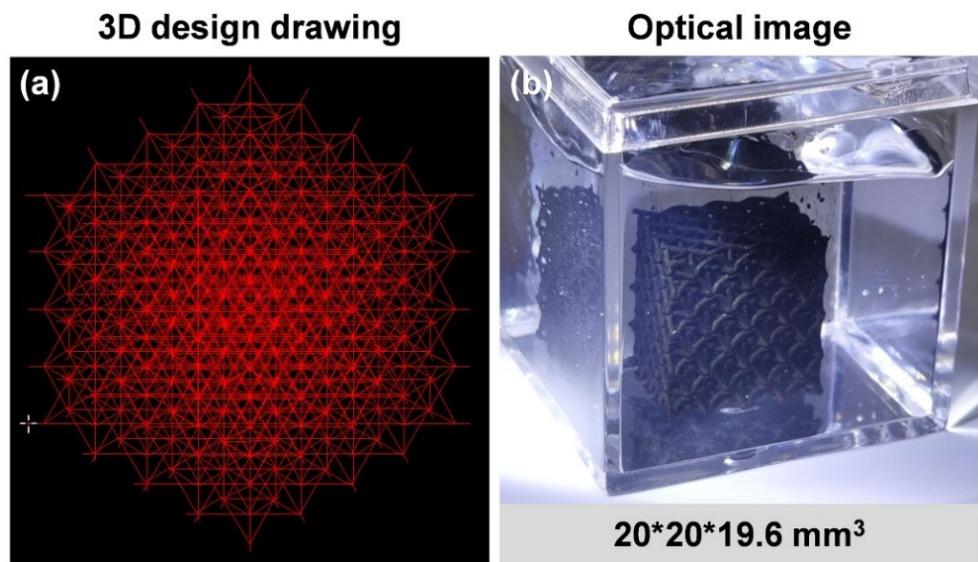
3D design drawing (a) and optical image (b) of the printed framework.
